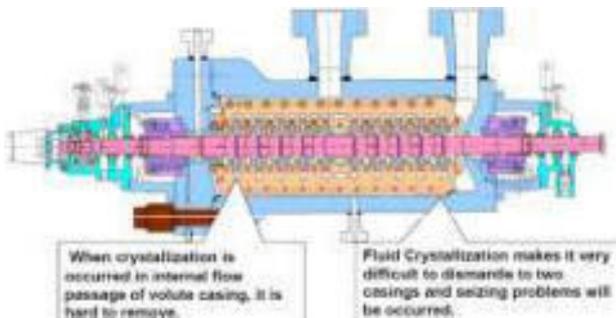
Cross-section drawing of a typical HP Carbamate Pump
